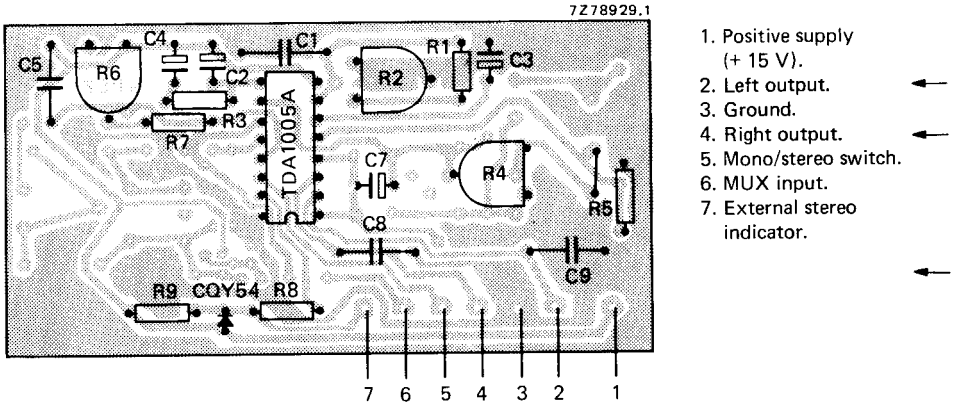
Printed-circuit board component side of a t.d.m. decoder, showing component layout. For circuit diagram see Fig. 10.
